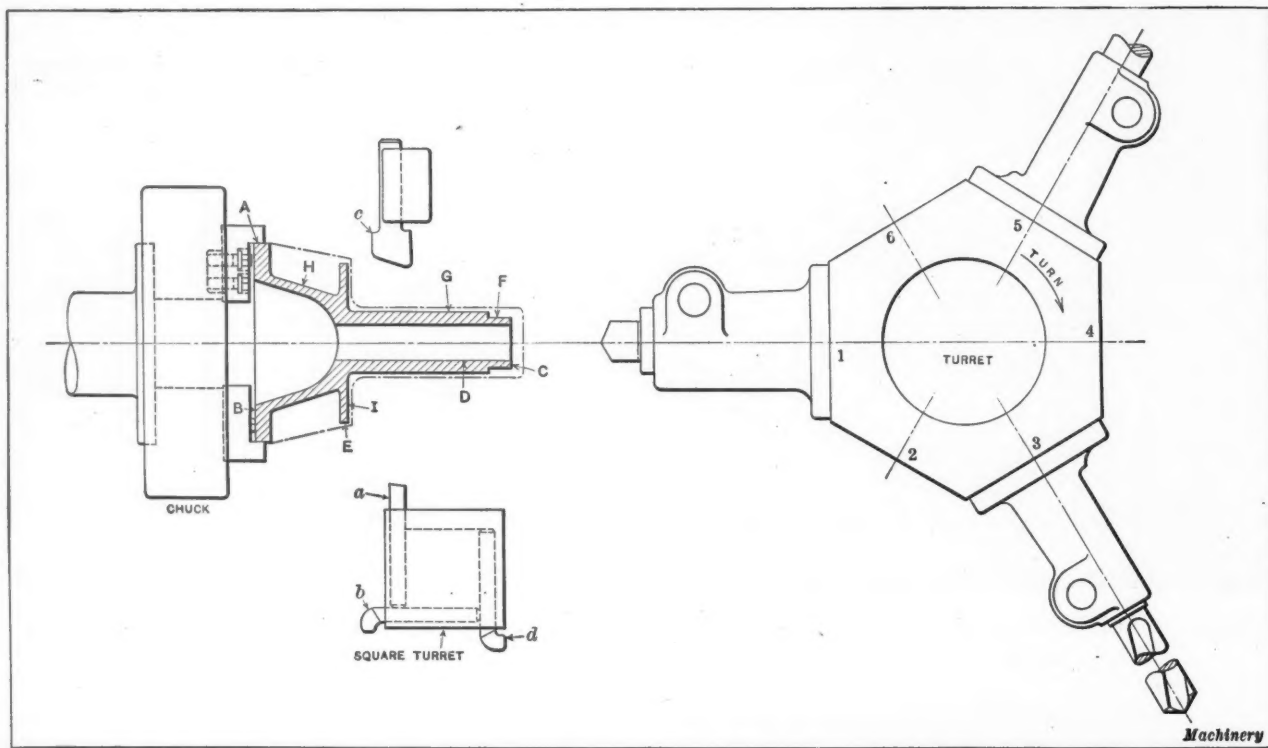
Tooling Equipment employed in First Operation on Airplane Engine Nose-piece
